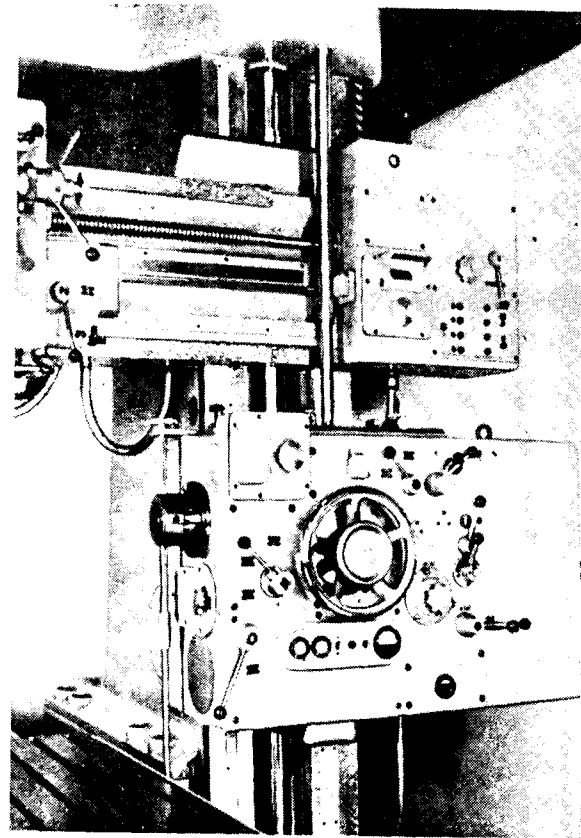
Horizontal headstock and feed gearbox of cross rail.
